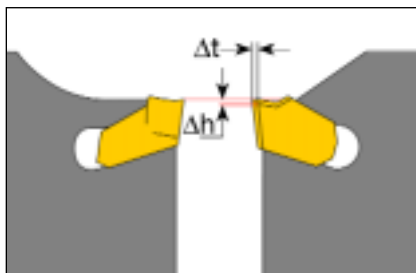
The T-style (right) insert/blade combination incorporates a simple wedge clamp. The insert is wedged into the pocket and held by the tension created by the holder. The F-style insert and blade have a fixed pocket location. A stop molded into the insert makes contact with top of the support blade. Δt =change in travel, Δh =change in height.
